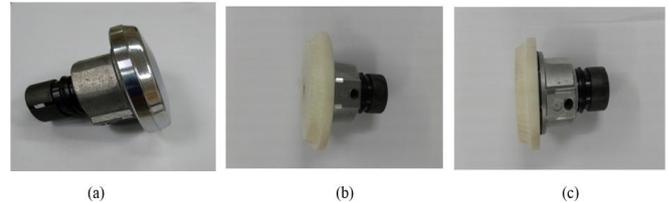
After assembling the adapter in bearing (a) system A (b) system B and (c) System C
